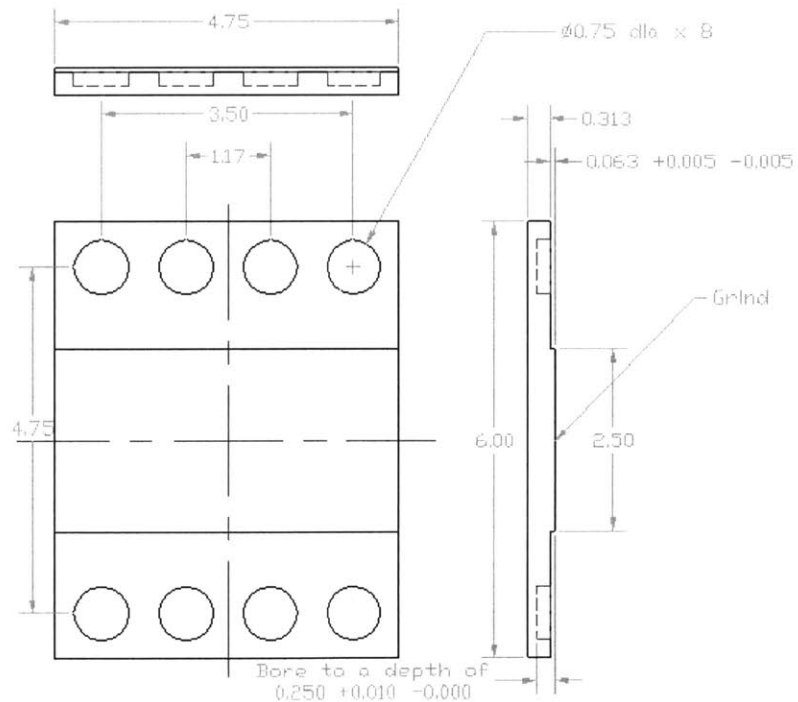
Press Plates used for Electrode Manufacturing (Dimensions in inches)
